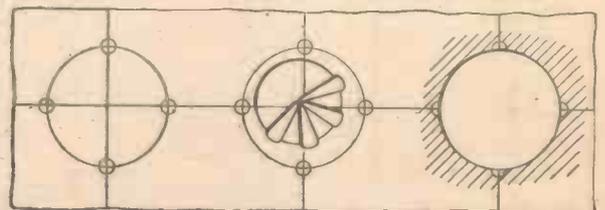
Grooved channels to aid correction. (Left to right) The marking. The wandering drill. The correctly positioned bore.
